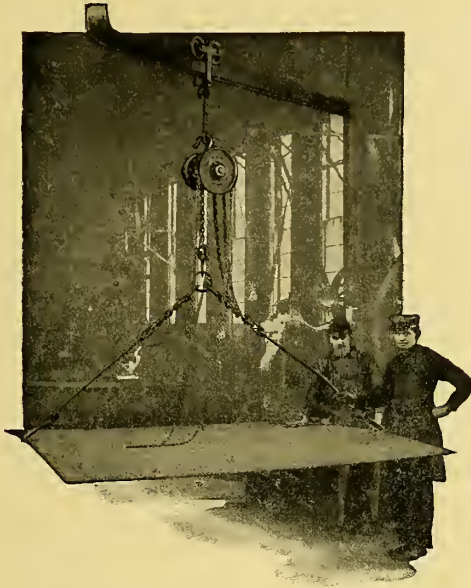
CRANE AND HOIST FOR HANDLING PLATES.
